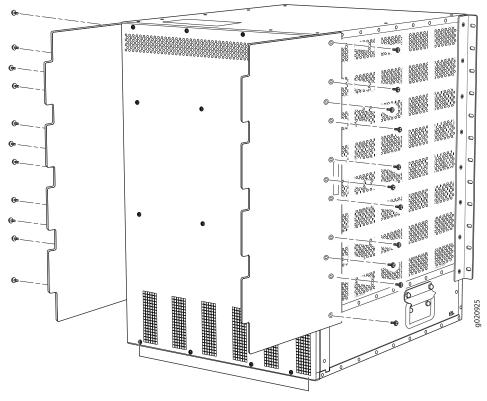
Install Side Plates on the Switch Before Mounting in the Cabinet
